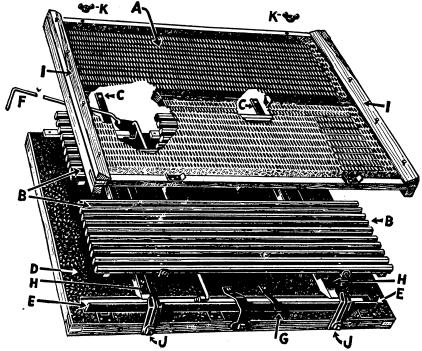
Working parts of self-cleaning threshing screen. A, long oval mesh of zinc; B, cleaning rack of air-dried birch soaked in oil; C, rack irons bolted by individual attachments to threshing machine; D, sheet-metal bottom for dockage to slide away on; E, dockage gate open; F, hand lever controlling dockage gate; G, spring to hold gate in either open or closed position; H, iron-shod slides for cleaning rack; I, side strips, adjustable to fit width of threshing machine; J. clamps to hold assembly together; K, wing nuts
